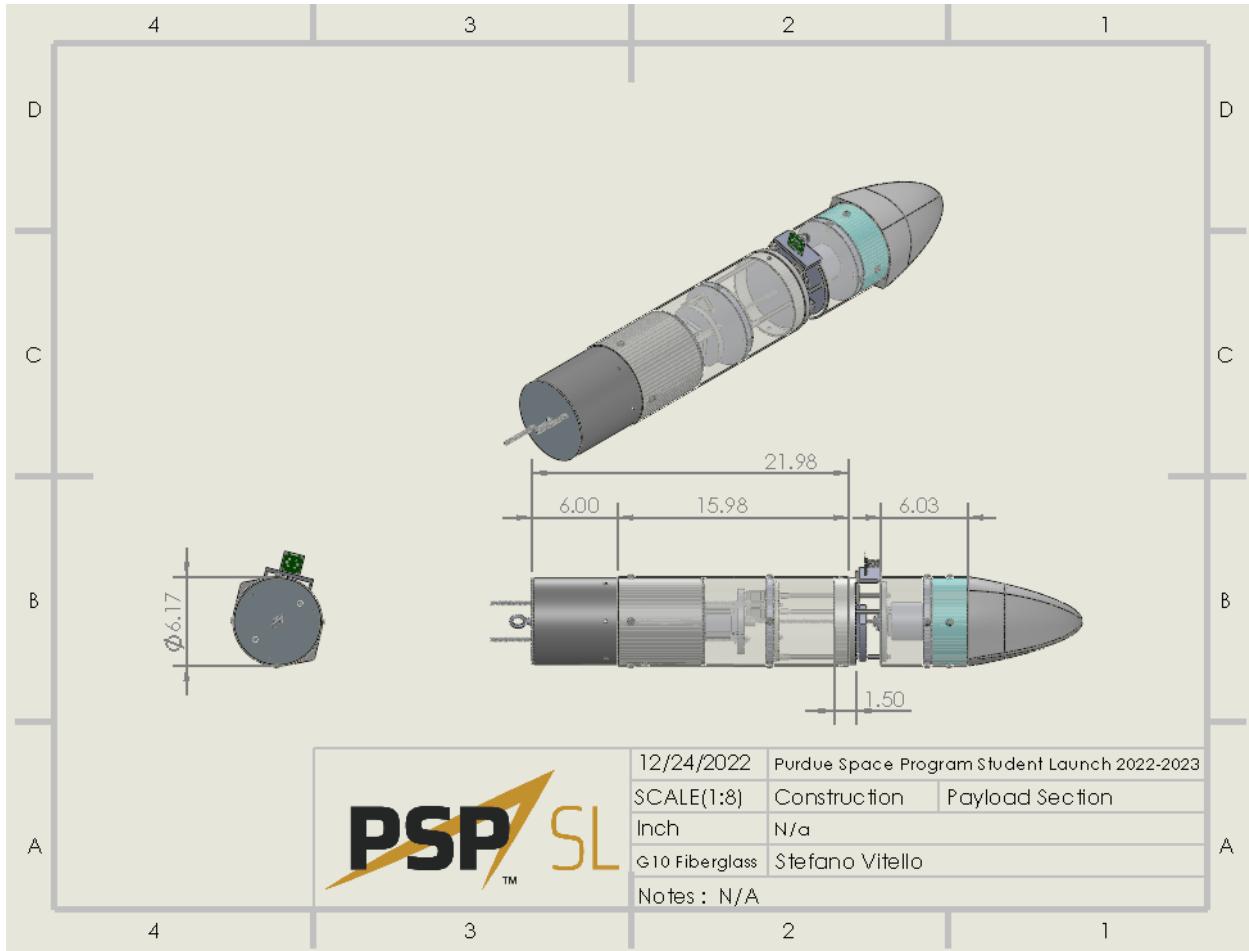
Technical Drawing for Payload Section
